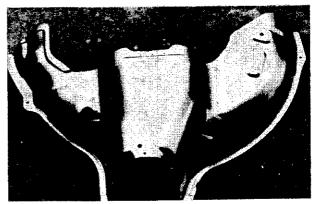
Press formed one side galvannealed steel sheet, showing bare side surface
